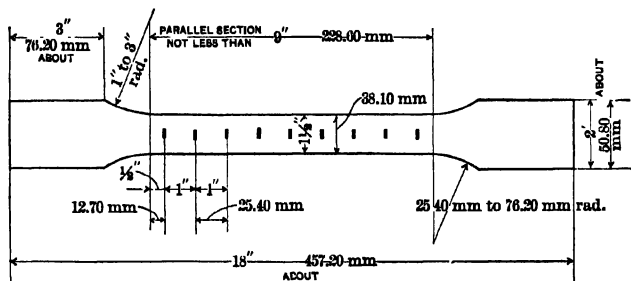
STANDARD FORM OF TENSION-TEST SPECIMEN.
